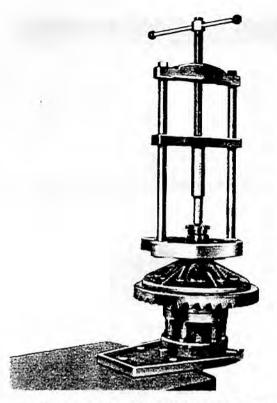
REMOVING DIFFERENTIAL BEARING CONES
